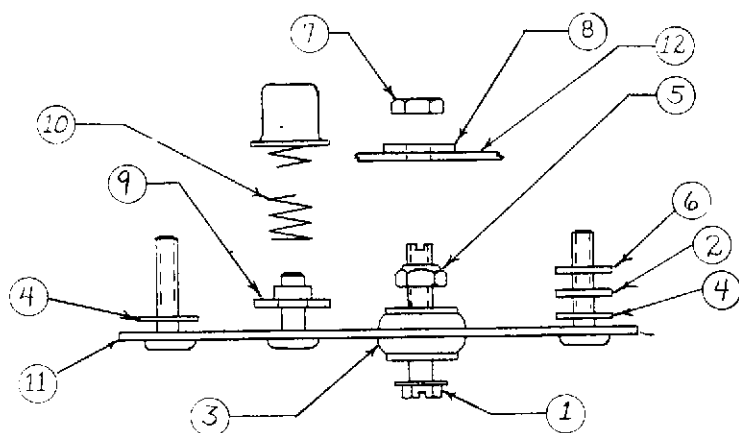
1030N MOTOR MOUNT ADJUSTMENTS
